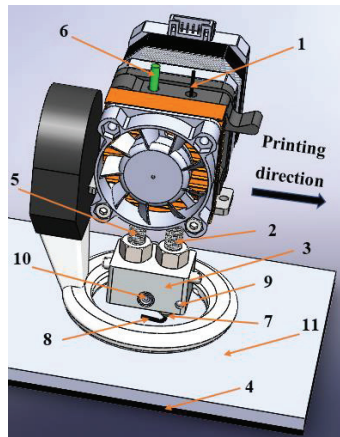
Scheme of the printing process: 1 – impregnated CCF; 2 – CCF feeding channel; 3 – heating element; 4 – printing platform; 5 – thermoplastic feeding channel; 6 – thermoplastic; 7 – printing nozzle; 8 – homogenous composite filament; 9 – thermocouple; 10 – heater; 11 – borosilicate glass
